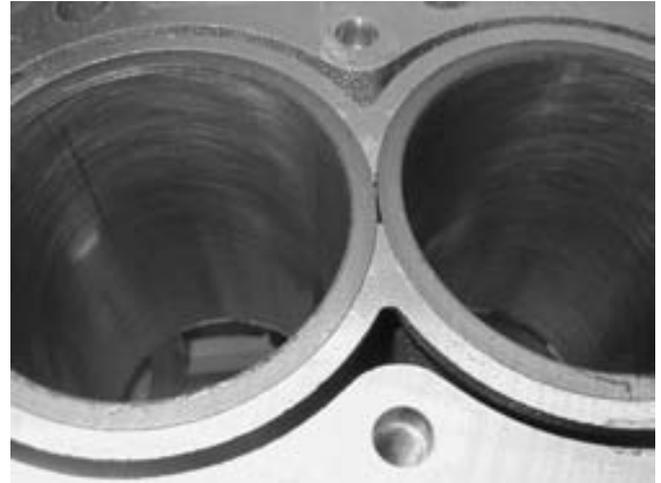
Cast-iron dry sleeves are used in aluminum blocks to provide a hard surface for the rings.
